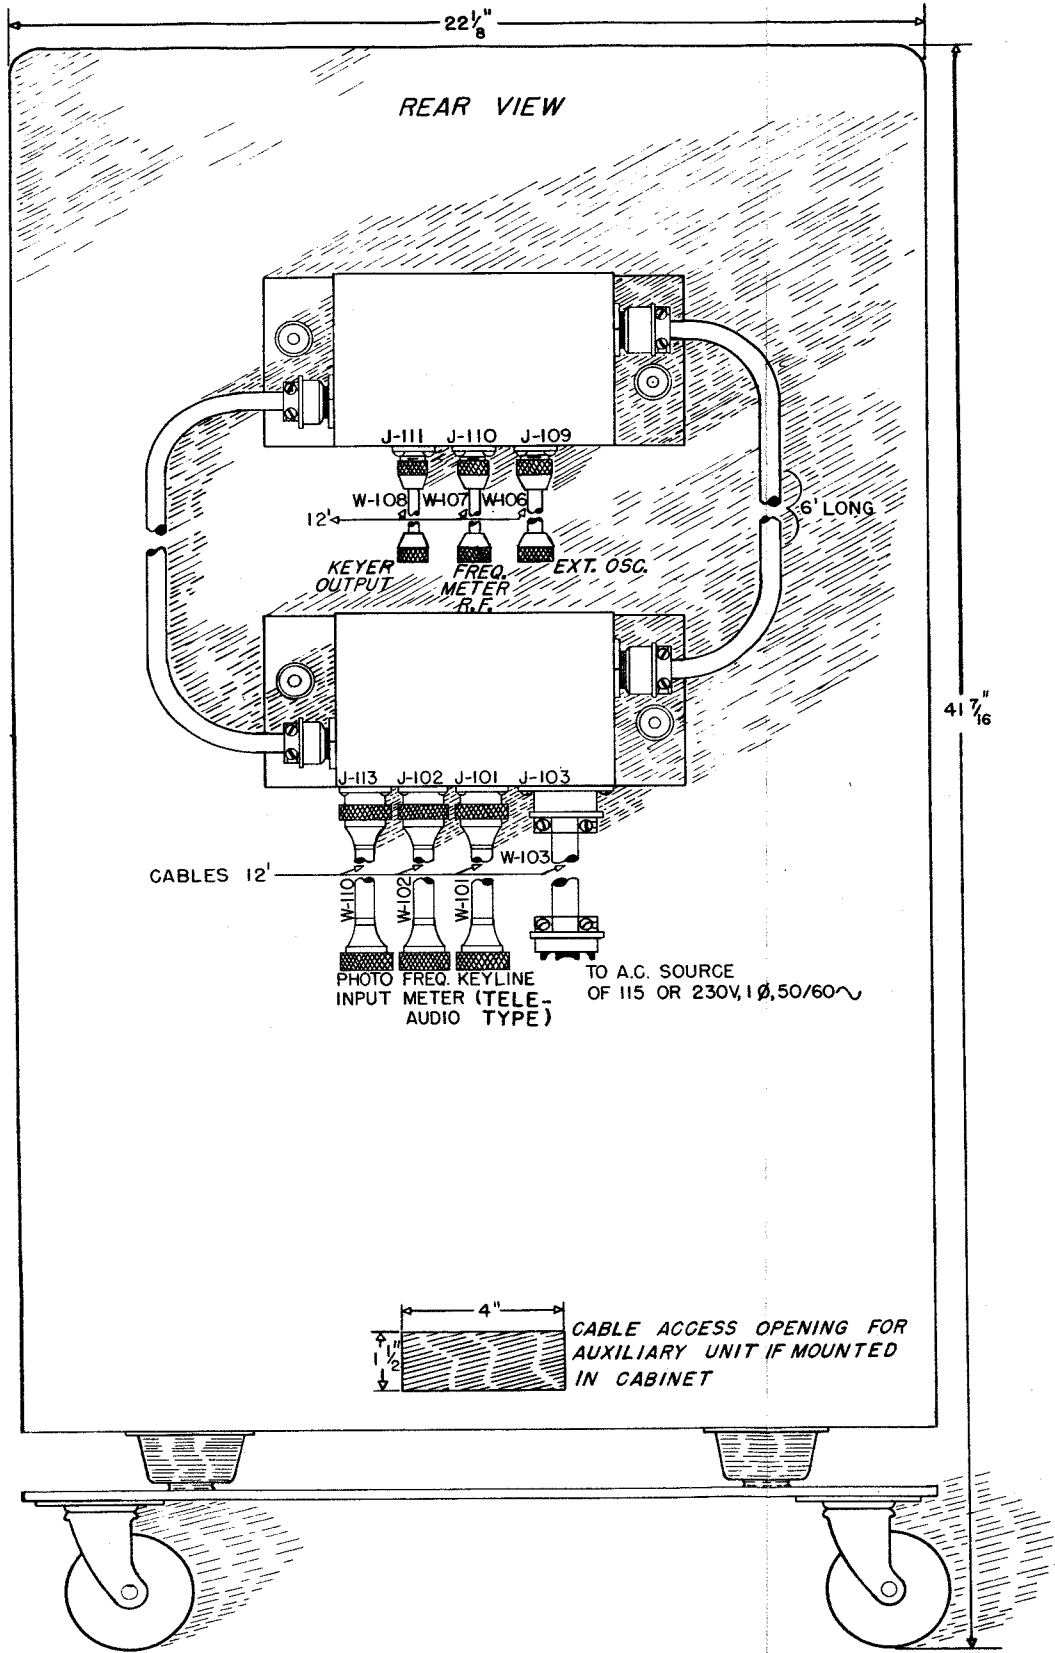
Keyer KY-58/GRT, Dimensional Outline and External Connection Drawing
